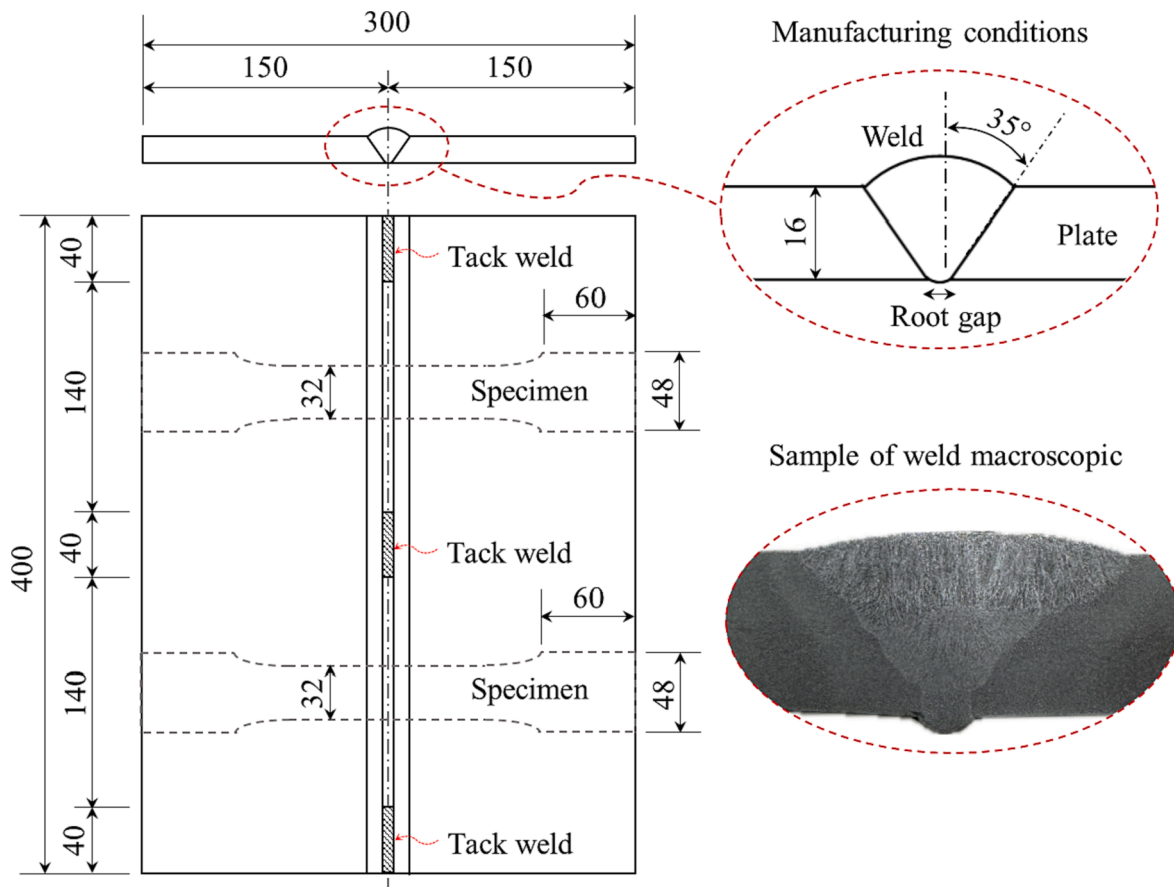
Schematic for the preparation of the butt-welded joint specimens (units in millimeters).
